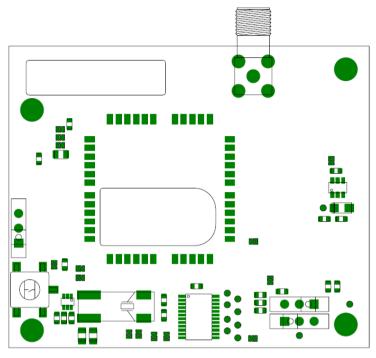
WISMO Series Socket-Up Board Assembly (Top View)
